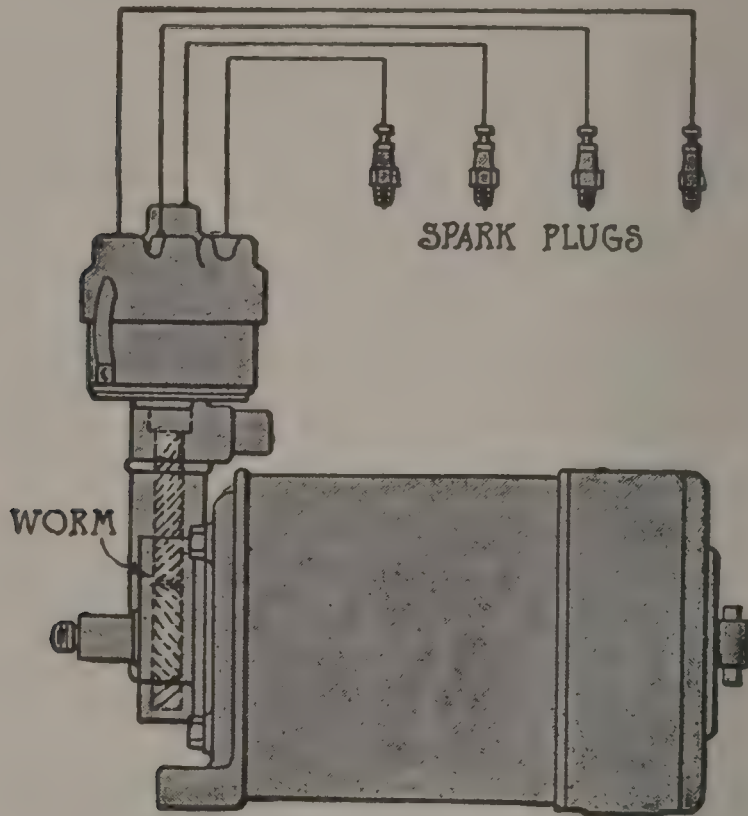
One unit of a two-unit system. This is a combined lighting and ignition generator, the cranking apparatus being separate. The distributor is driven by a worm and vertical shaft
